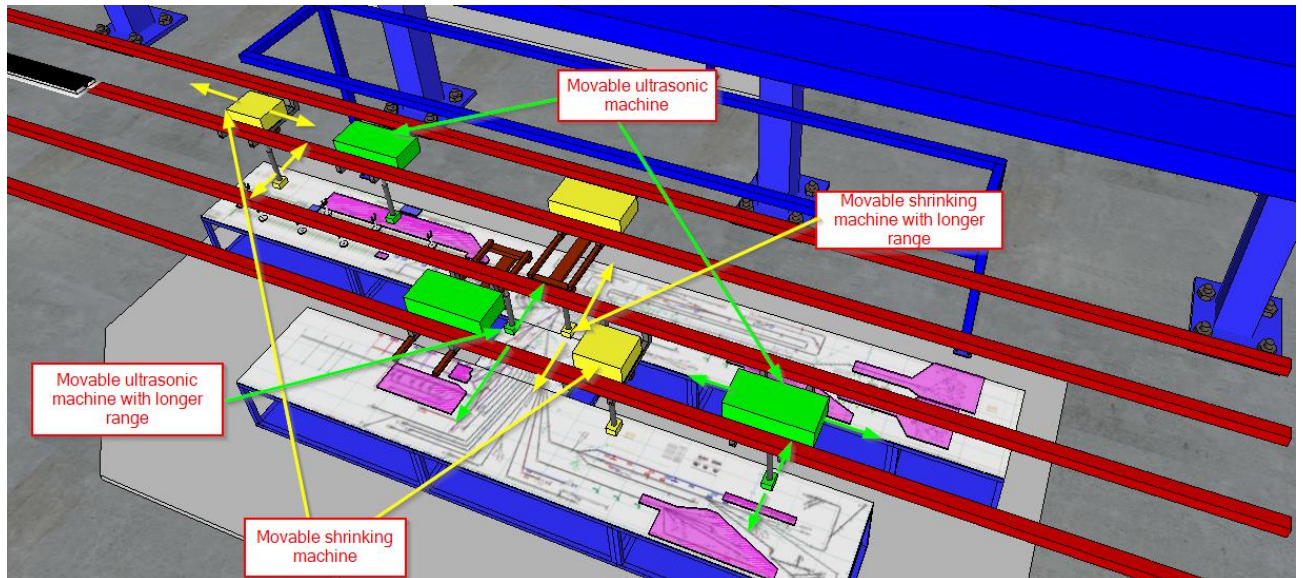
SFTP XVK81 chassis harness assembly station on rotary conveyor
